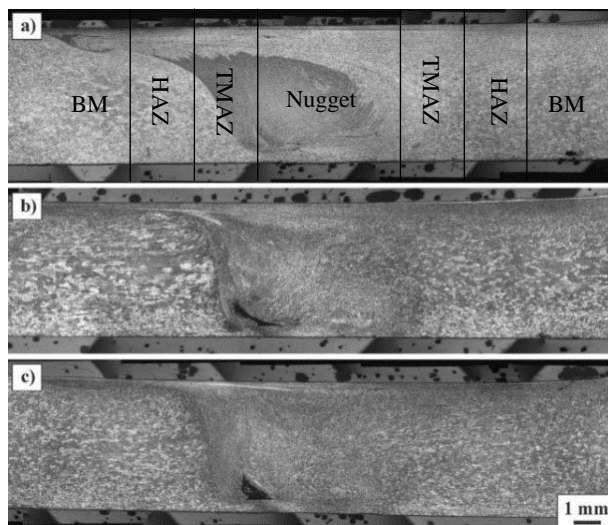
Macroscopic depiction of welds welded with one reservoir tool; welding speeds: a) 17 mm/min , b) 46 mm/min , c) 91 mm/min .
